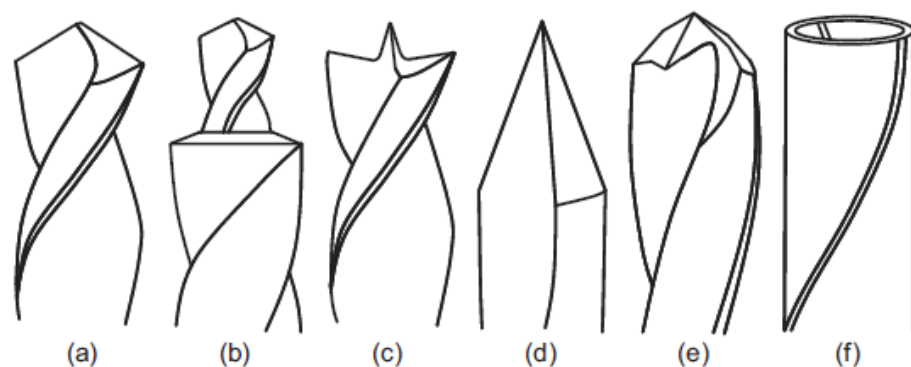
Schematic of special drill bit geometries used for drilling of fibre reinforced composites: (a) standard twist drill; (b) step drill; (c) candle stick drill; (d) dagger drill; (e) core drill; (f) multi-faceted drill [45].
